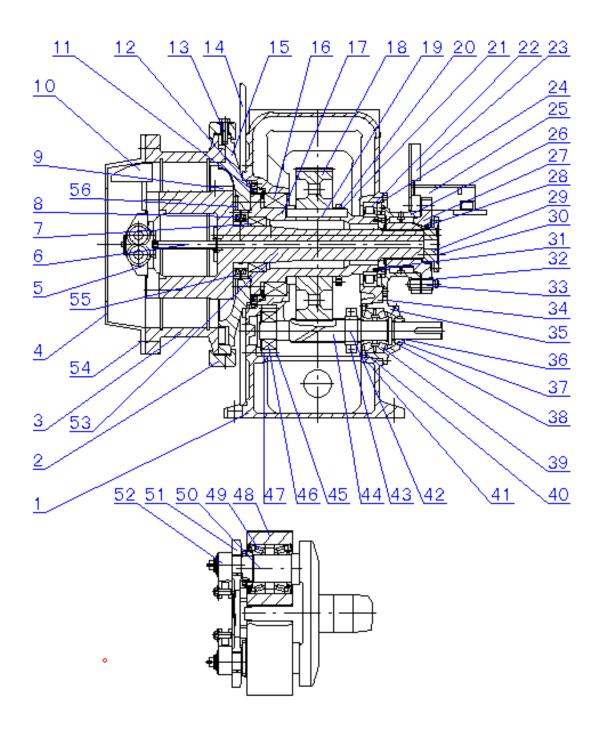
SZLH678(768) PELLET MILL GEARBOX STRUCTURE
